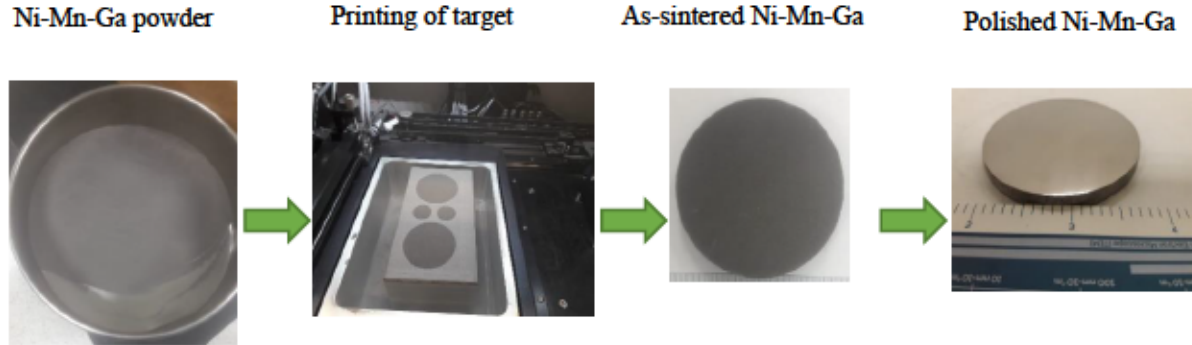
Sequence of target manufacturing process by binder jetting additive manufacturing.
